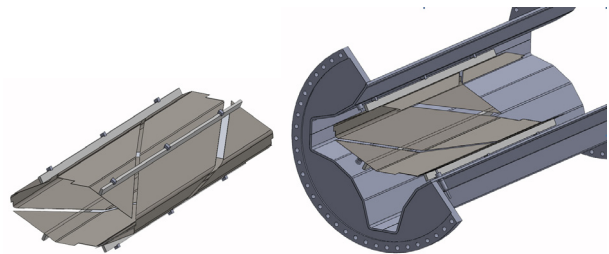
Schematic drawing of the spiral-shape BPM electrodes (left) and its location inside the wide quadrupole vacuum chamber (right).
